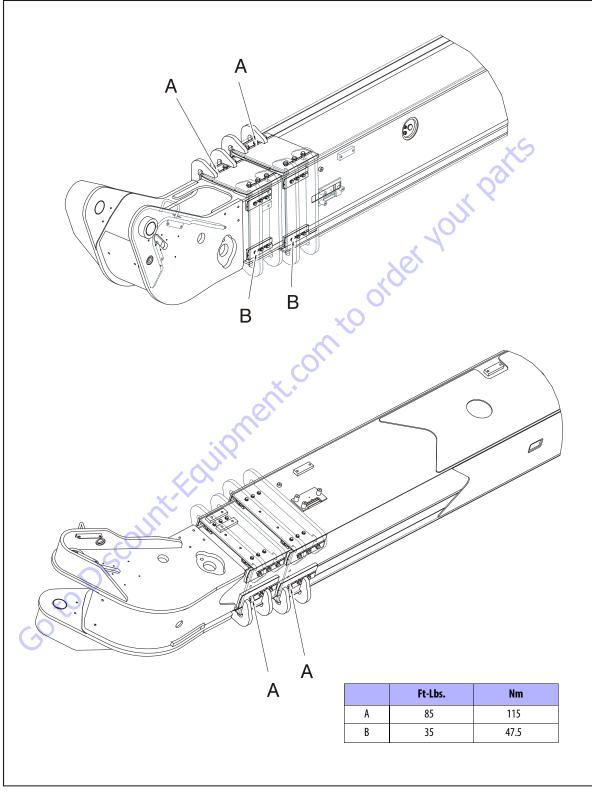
Tower Boom Assembly Torque Values - Sheet 1 of 2
